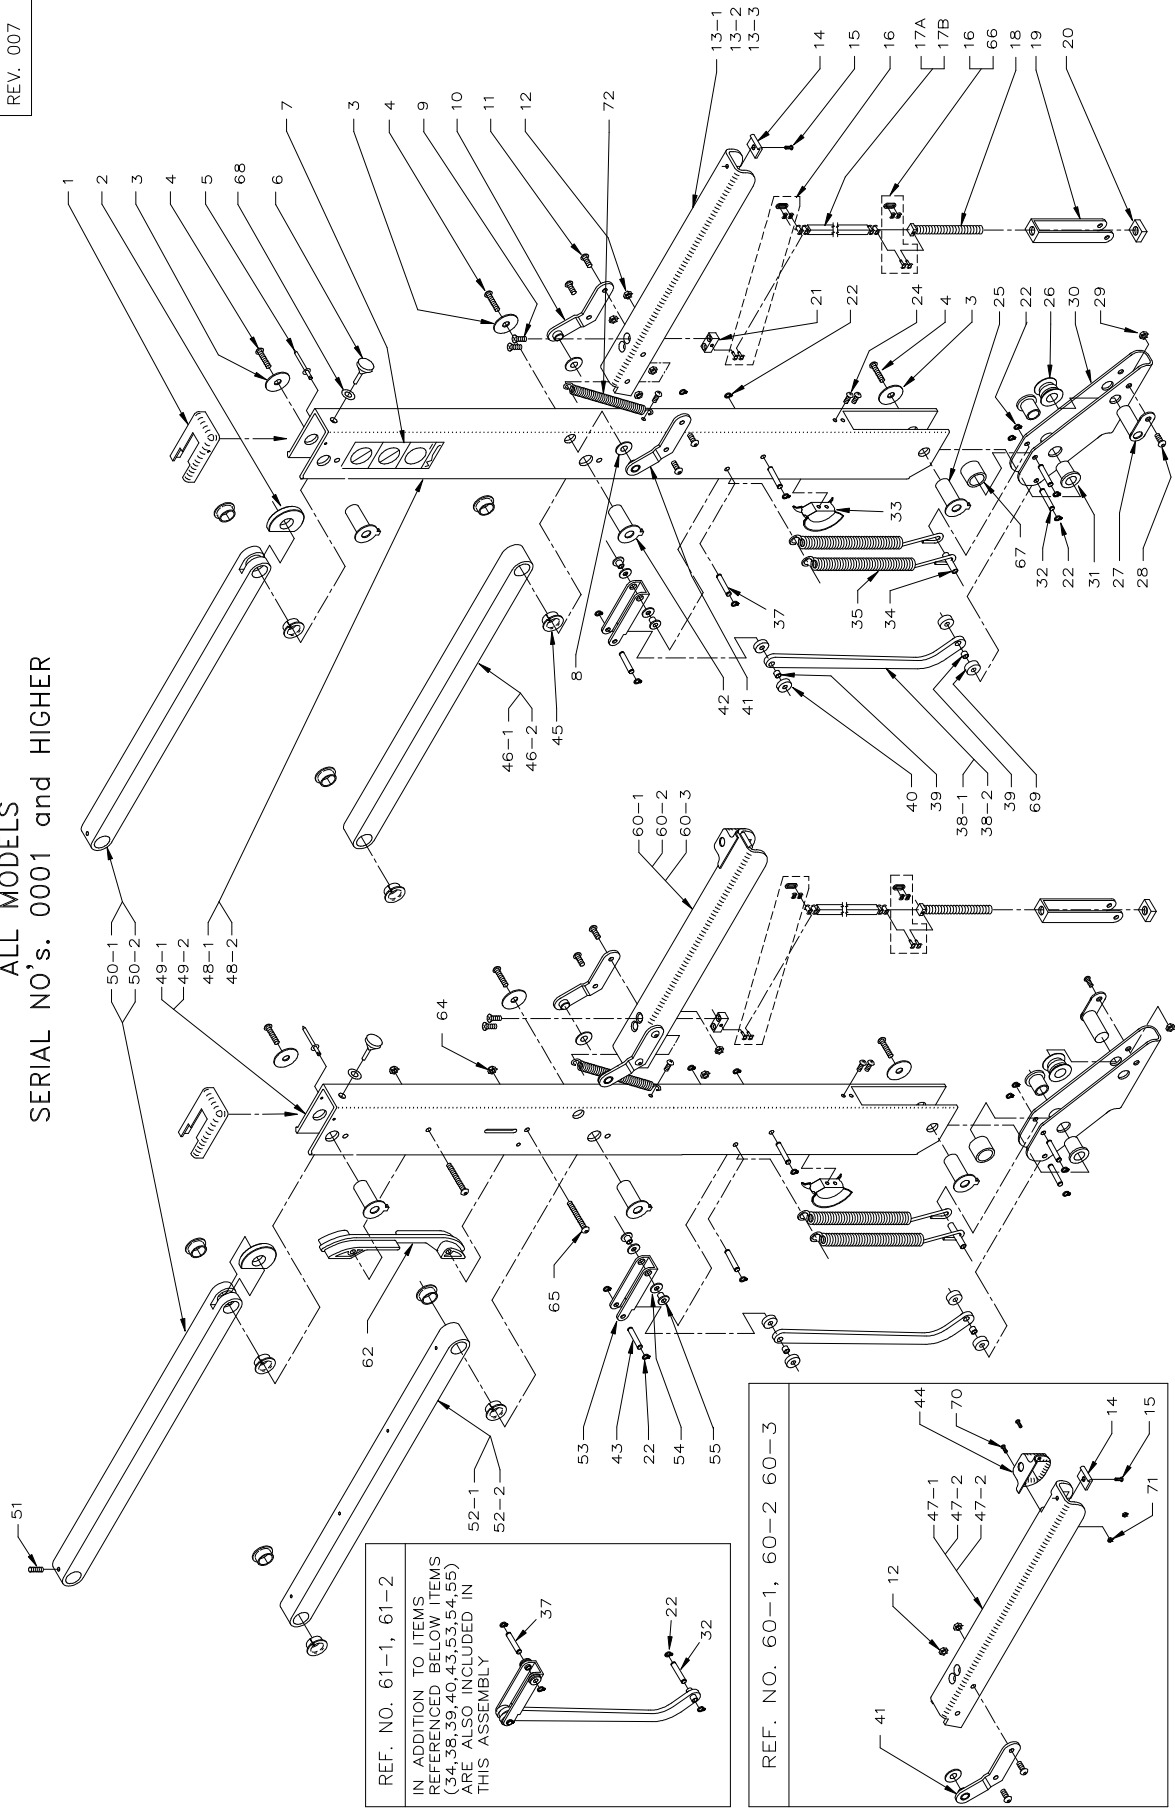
UNI-LITE PLATFORM POST ASSEMBLY
